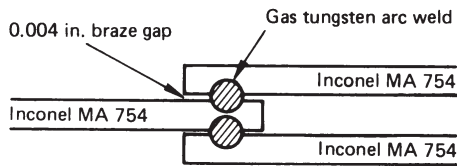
Brazing specimen assembly used to evaluate stress-rupture properties of brazed Inconel MA 754
